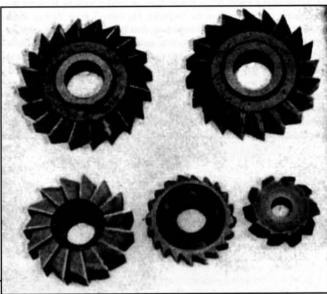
Some finished cutters. Left to right top: pair of 2 in. side and face. Bottom: face mill, slotting cutter, and double angle relieved cutter.
